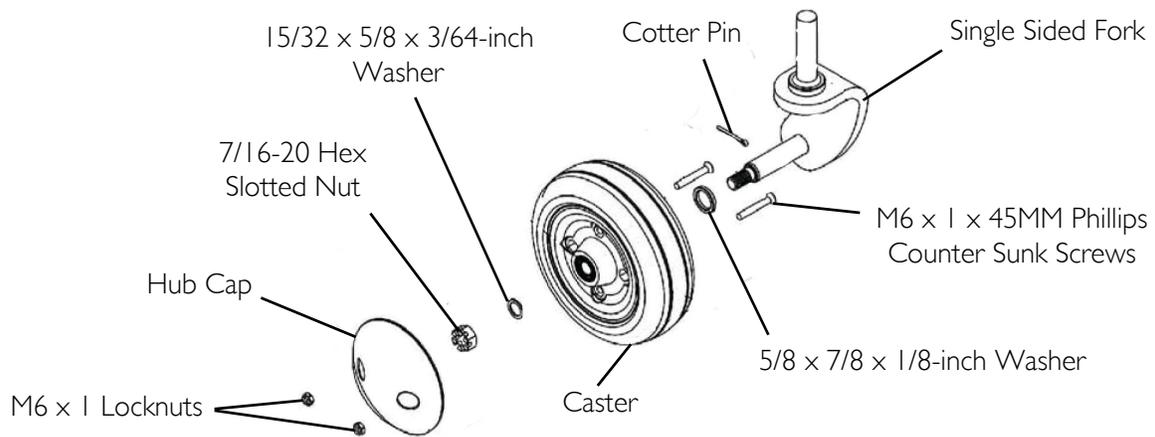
Replacing the Front/Rear Casters - Single Sided Fork
